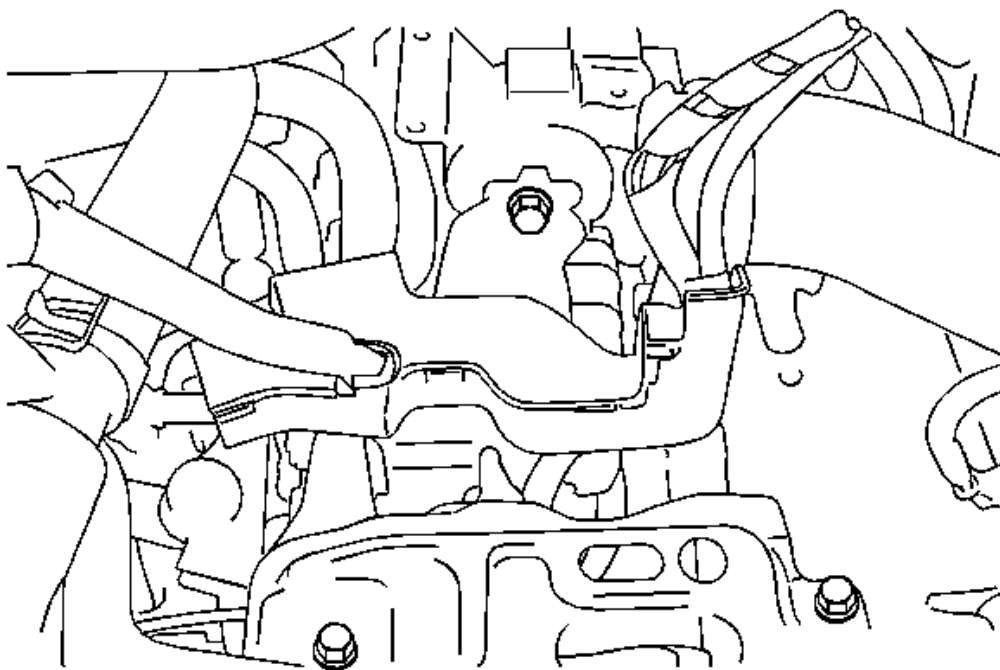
Identifying Wire Harness Clamps At Battery Carrier
